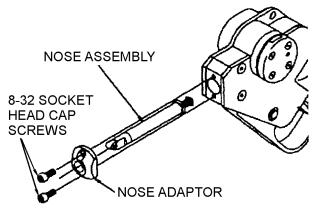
Removal of Safety Cable Tool Nose Assembly.
